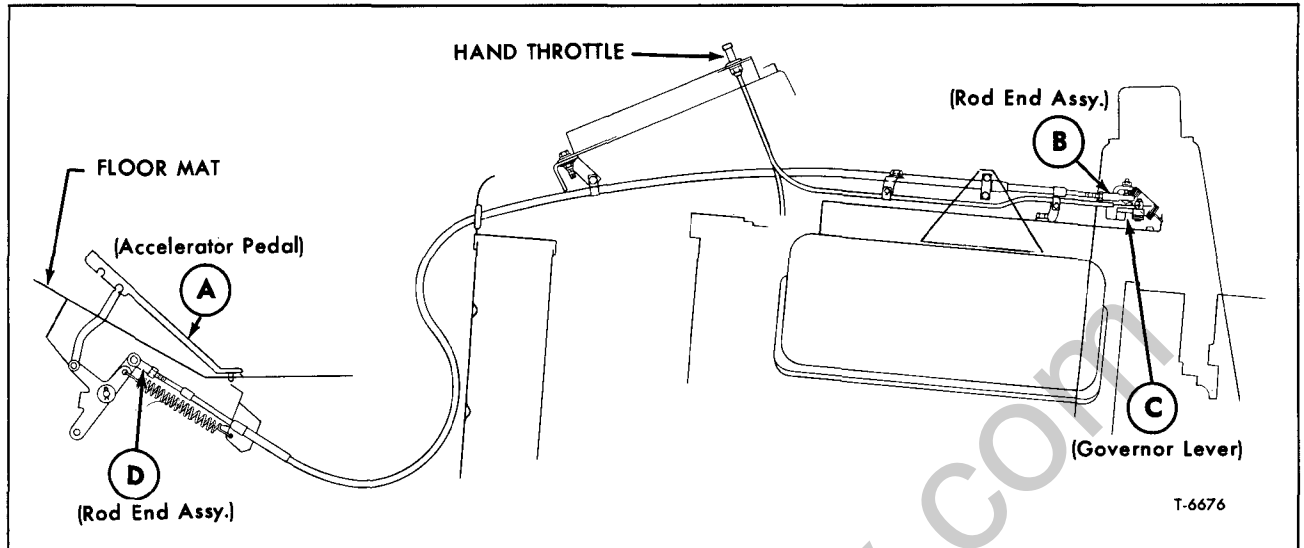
Flexible Accelerator Cable (Steel Tilt Cab Models)
